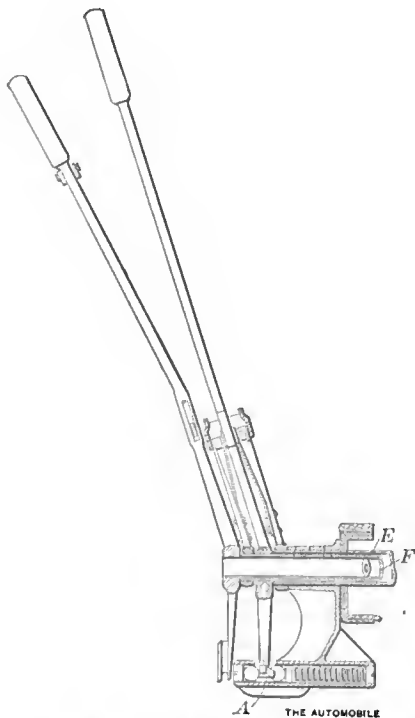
FRONT VIEW OF GEAR SHIFTING LEVER, PARTLY IN SECTION.
